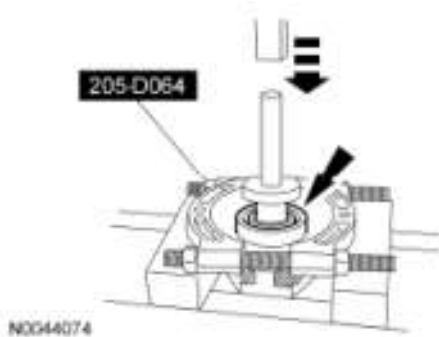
Removing Bearing Using Bearing Puller And Suitable Press
